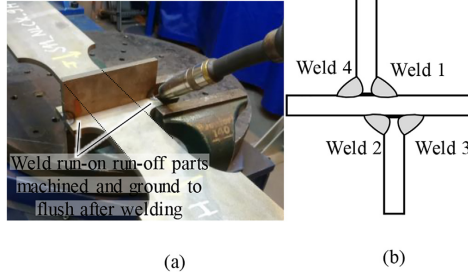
(a) Welding preparation of the test specimen with a robotic GMAW and (b) sequence of welds in the misaligned specimens.
